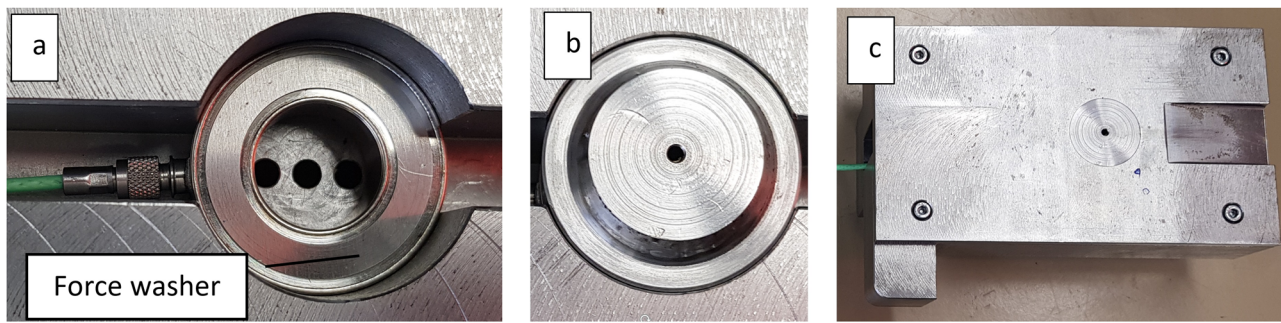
Quantitative measurement assembly (a) Force washer (b) Protection Plate (c) Fully assembled quantitative breech measurement plate.
